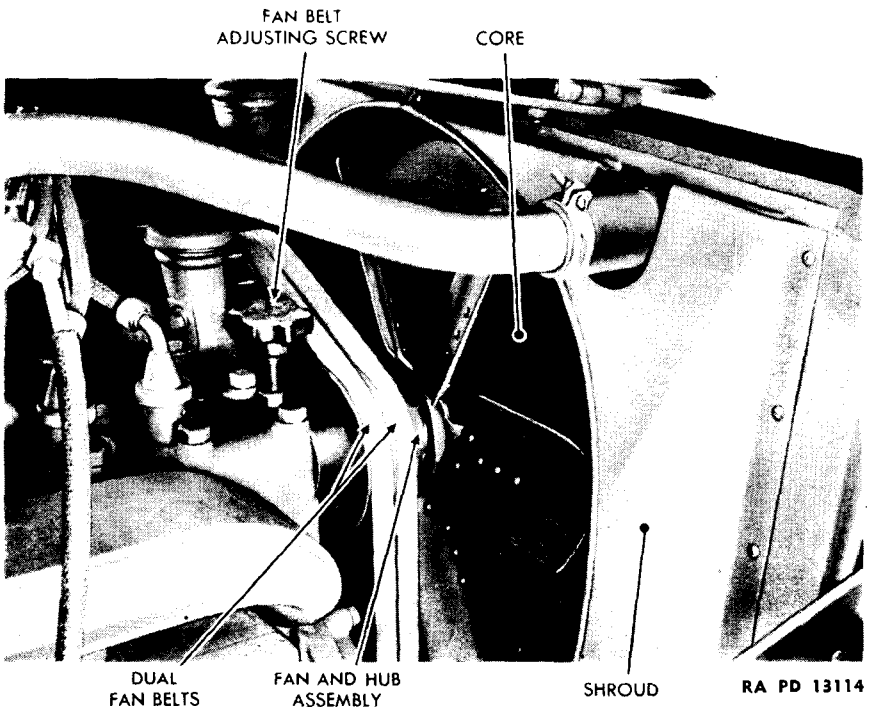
Radiator with Shroud - Installed - (Gasoline Engine)
